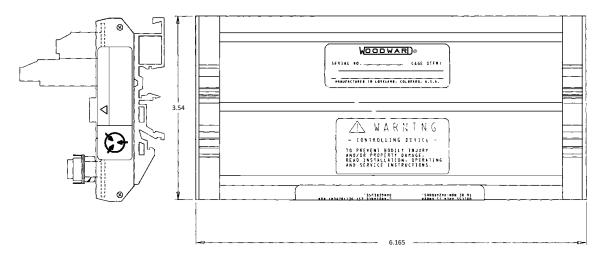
Two Channel Actuator Controller FTM Outline Dimensions
